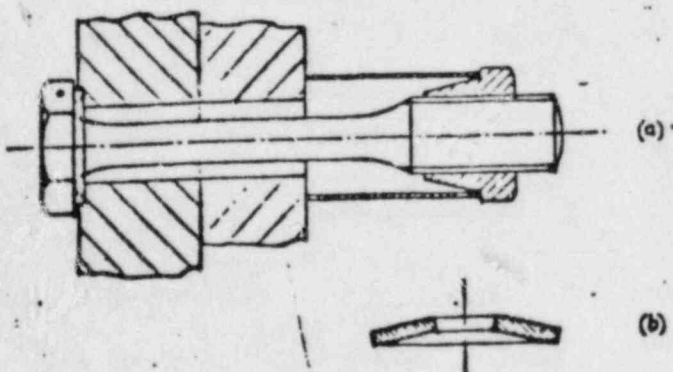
FIG. (a) A low-stiffness bolt assembly; (b) Belleville spring washer
